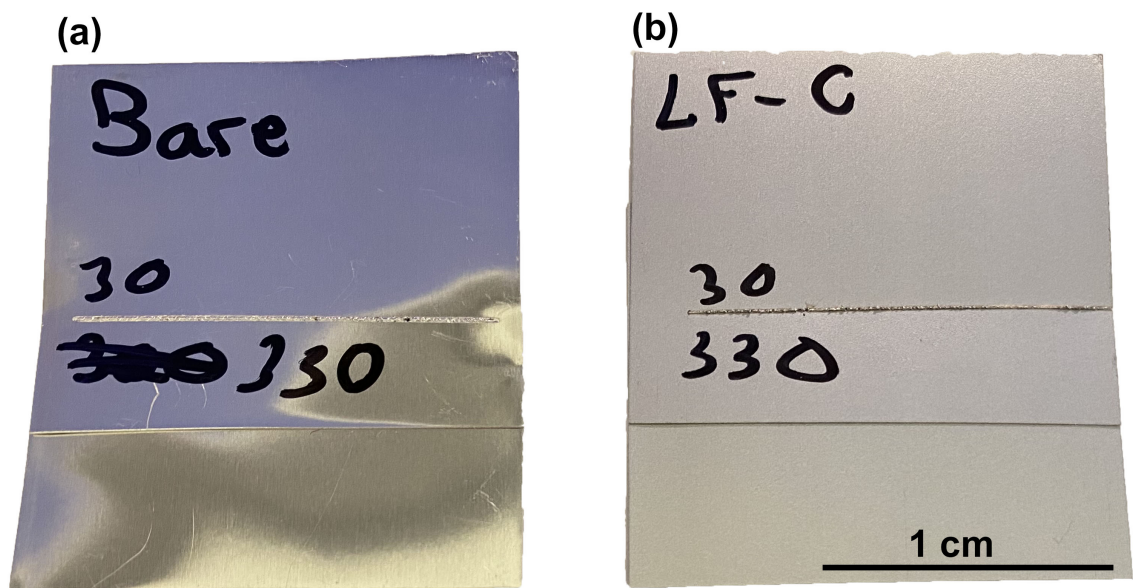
Both (a) and (b) were welded using a laser power of 668 W and a laser speed of 330 mm/s. In, (a) two bare tabs are welded together, while in (b) two anodized tabs are welded together.
